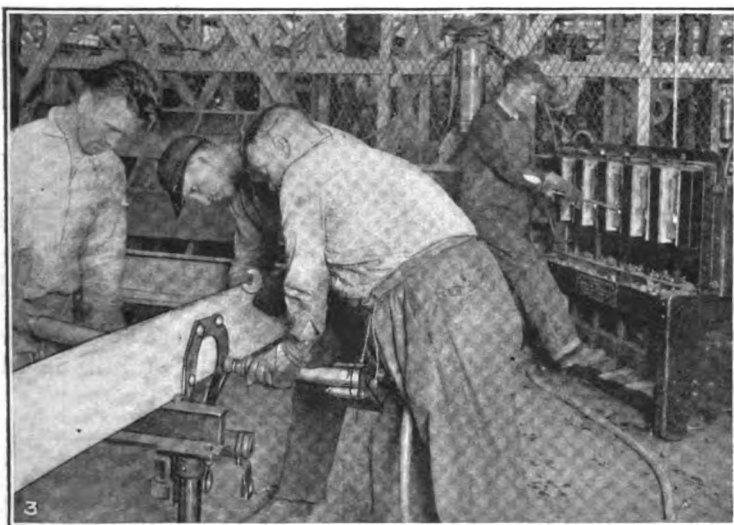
RIVETING THE FRAME. FIG. 4. DRILLING ADDITIONAL HOLES
